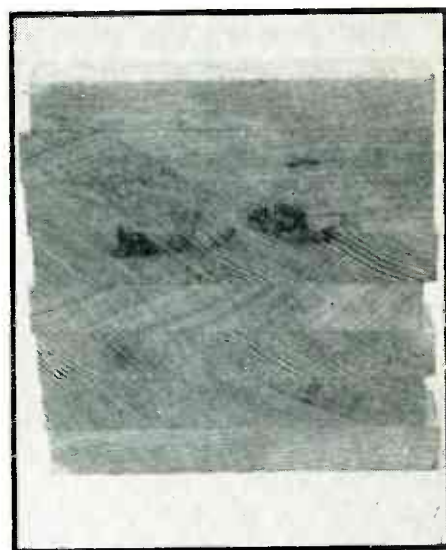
Piece cut from the end of the 6 in x 6 in. x 16½-ft block from which the multi-laminar spar is cut
